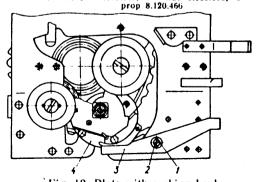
Plate with cocking knob; 1 - bushing 8.229.026; 2 - screw 8.900.021; 3 - lever 8.332.045; 4 - cam 6.365.027
